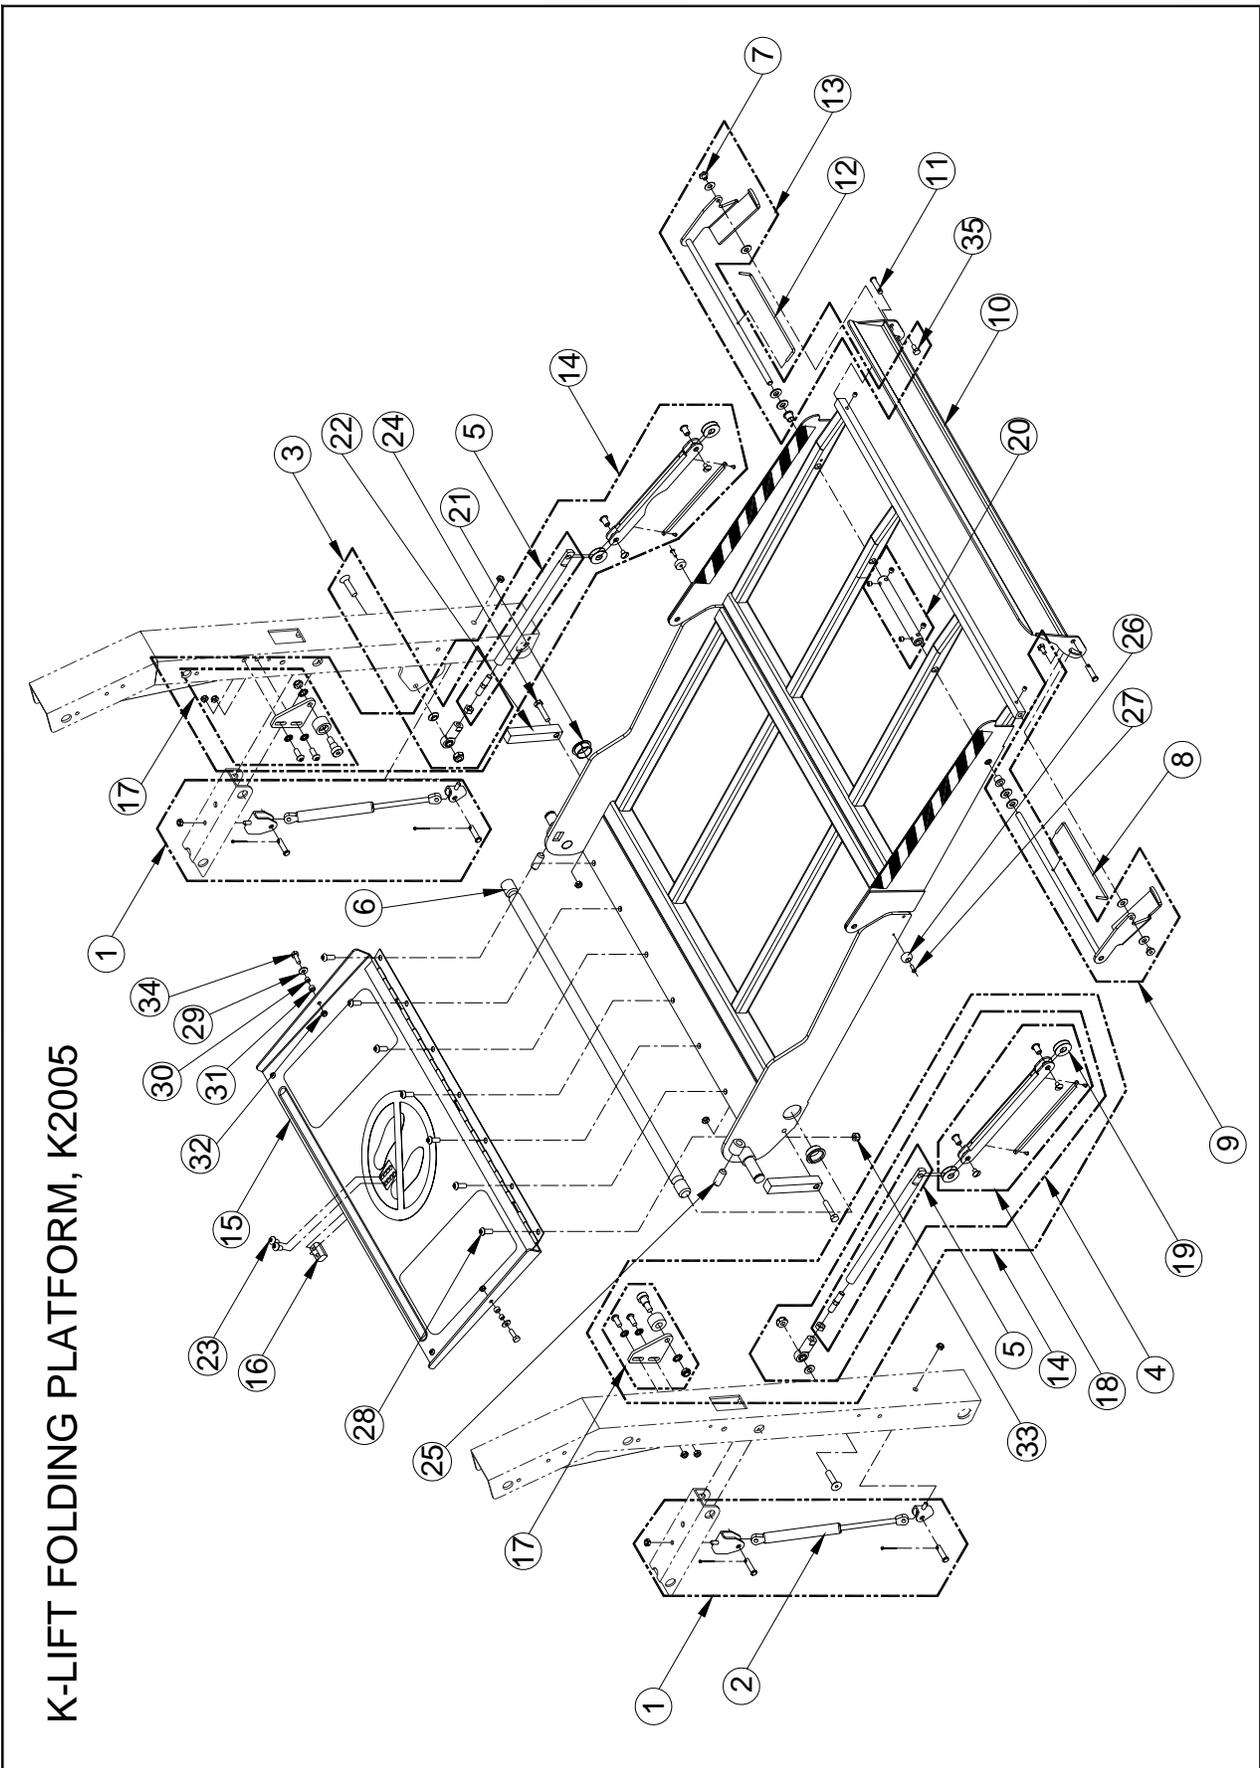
FOLDING PLATFORM ASSEMBLY, K2005
